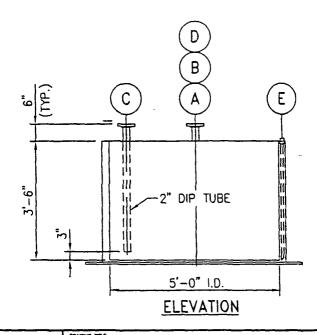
SV18.113 Jacket Water Tank Construction and Design Details.
